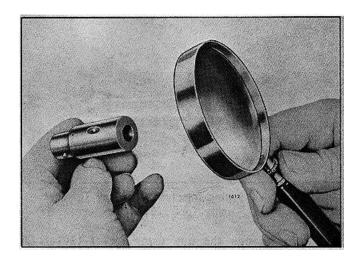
Examining Sealing Surface with a Magnifying Glass
